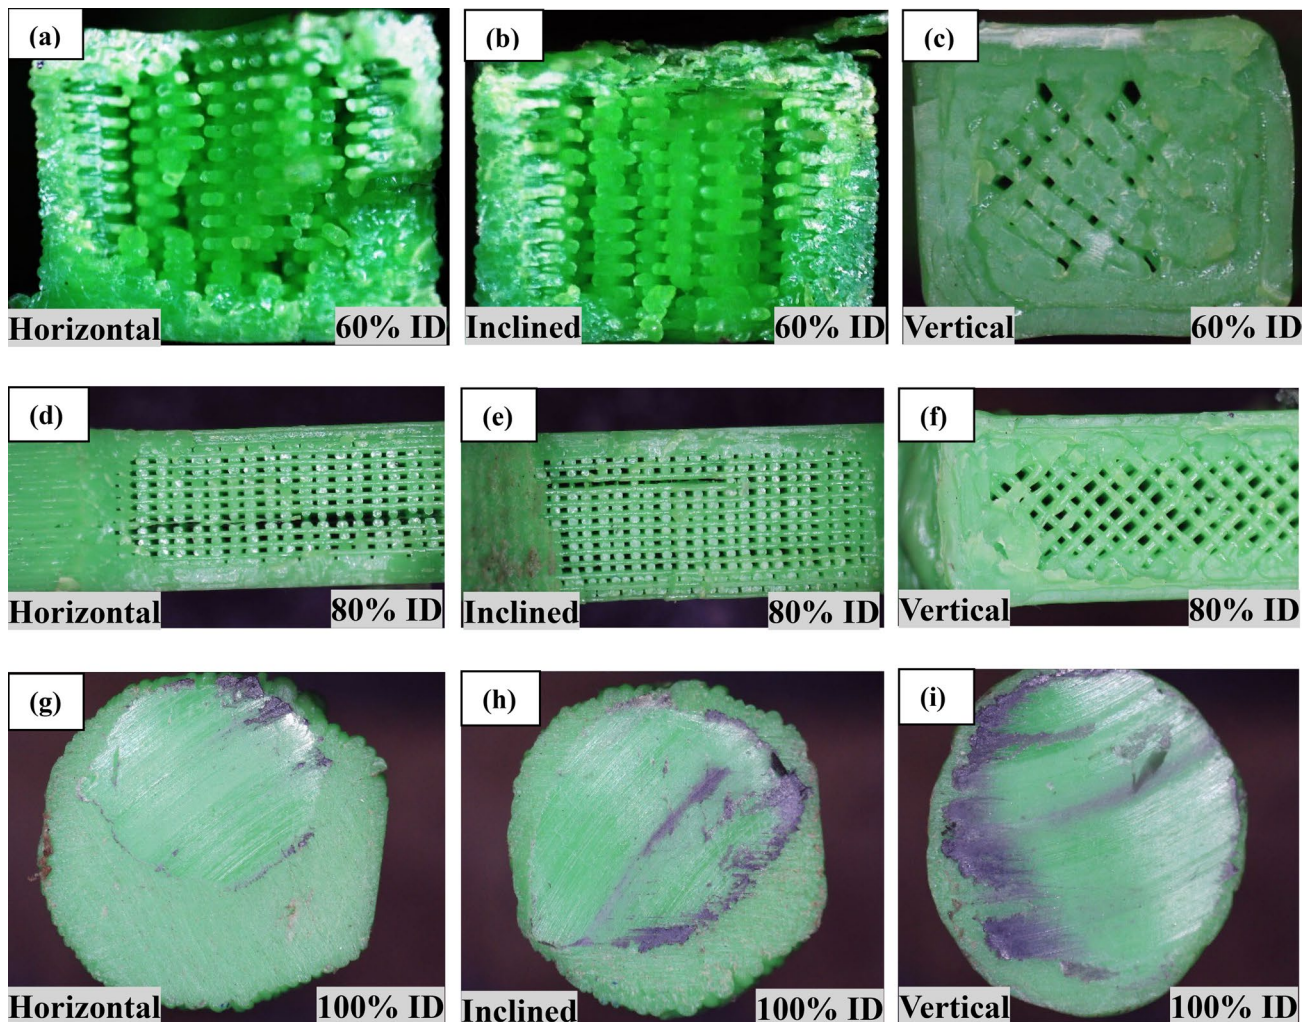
Macro images of the fractured specimens a–c tensile specimens, d–f impact specimens and g–i wear specimens
